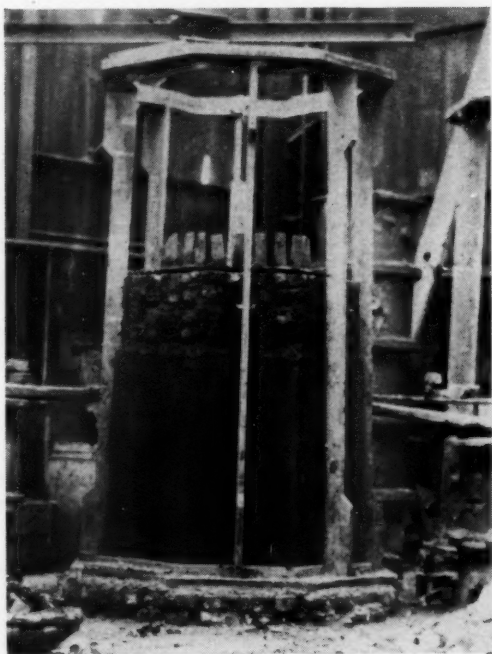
METHOD OF MAKING INGOT MOLD CORE.
